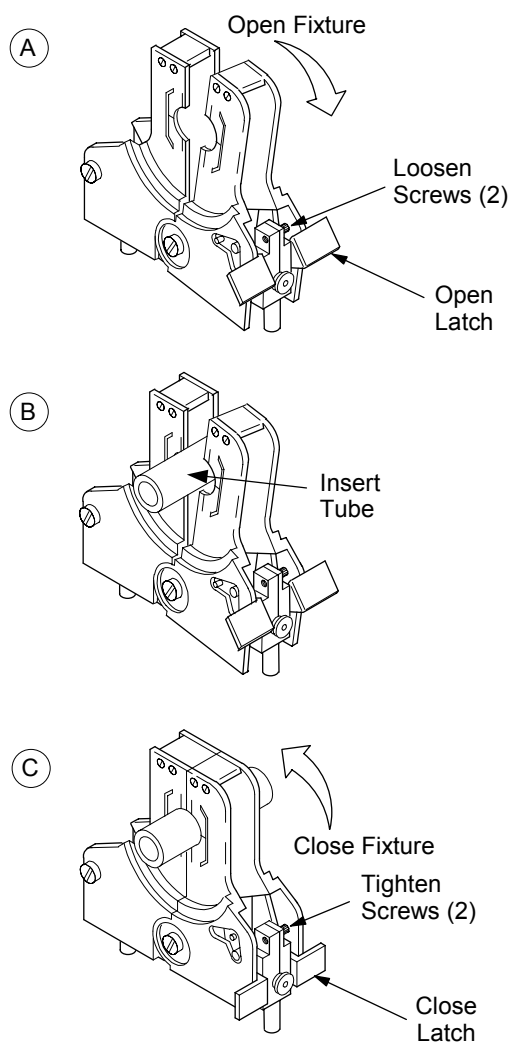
Aligning the Tubing in the Series 8 Micro Weld Head Fixture
